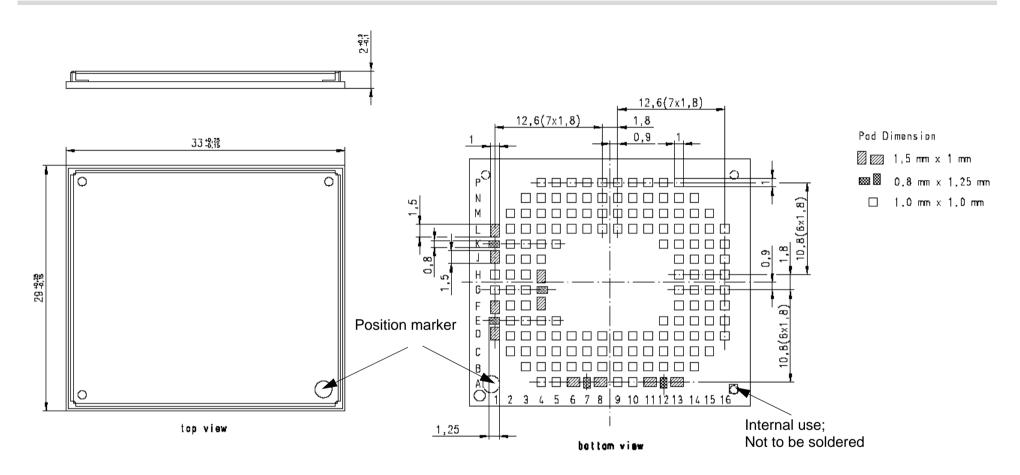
Dimensions of PHS8-E (all dimensions in mm)
